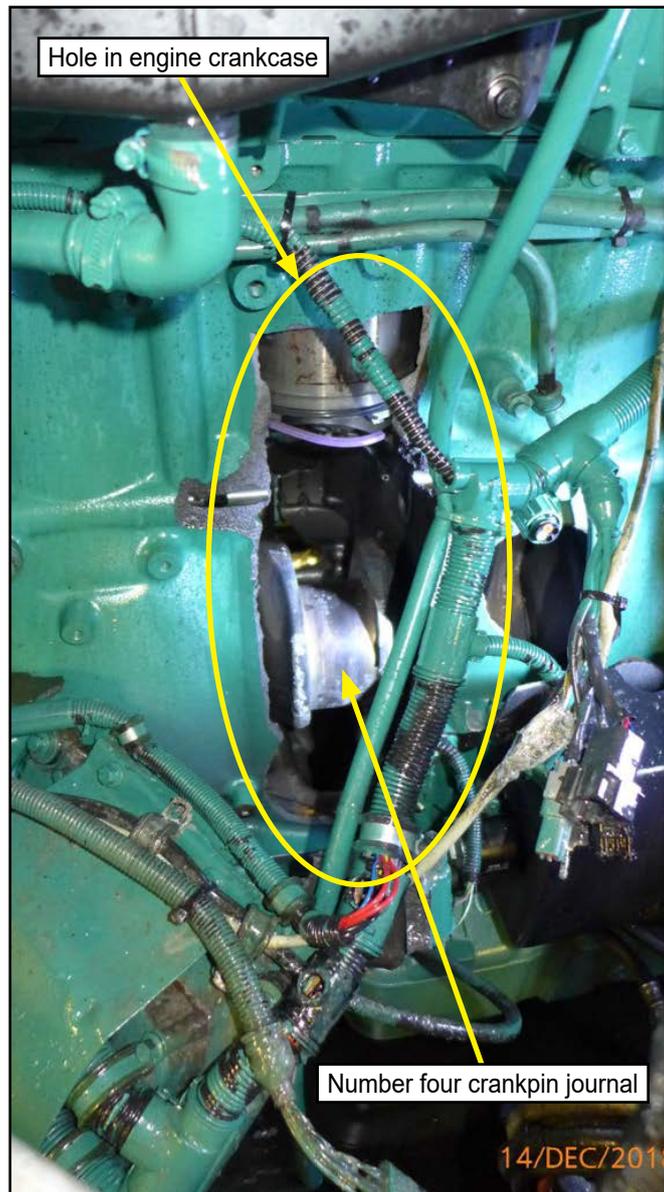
Hole in ME4 crankcase/engine block, showing number four crankpin journal
